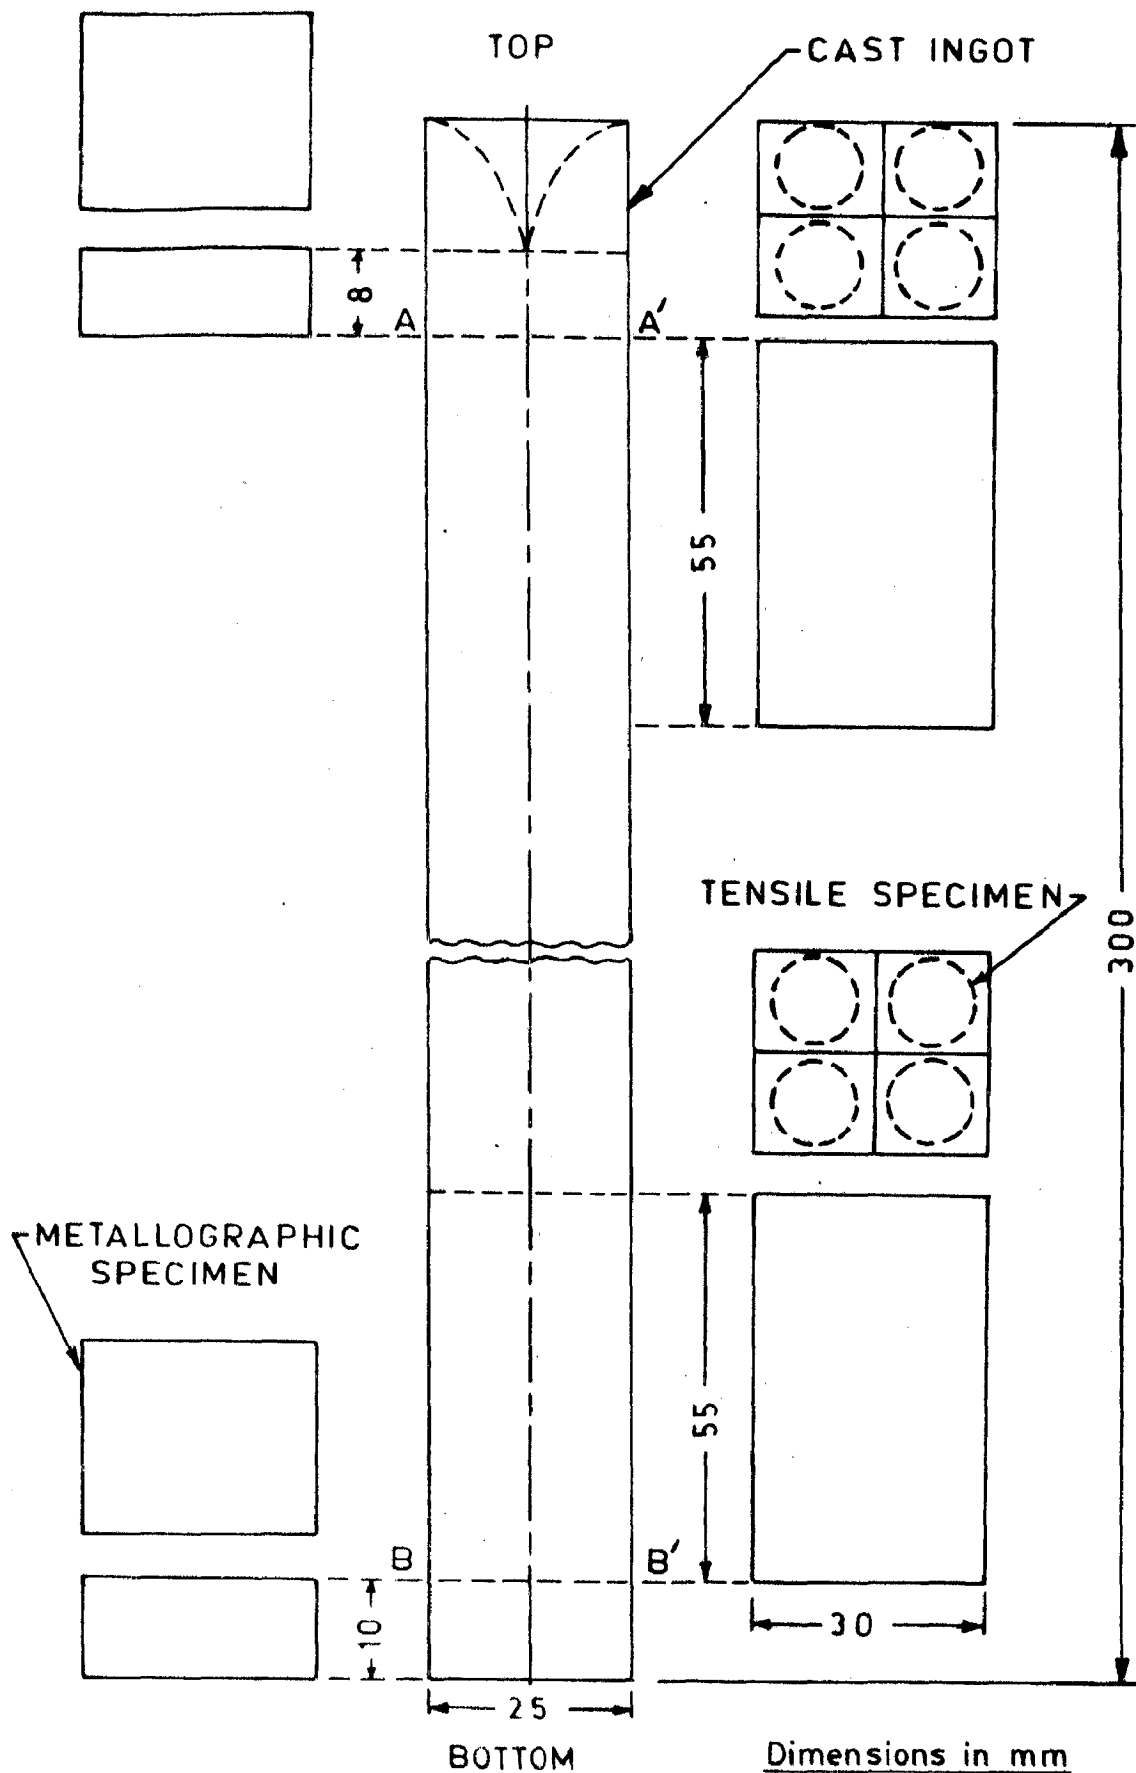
LOCATION OF THE TEST SPECIMENS MACHINED OUT FROM THE CAST INGOTS.
